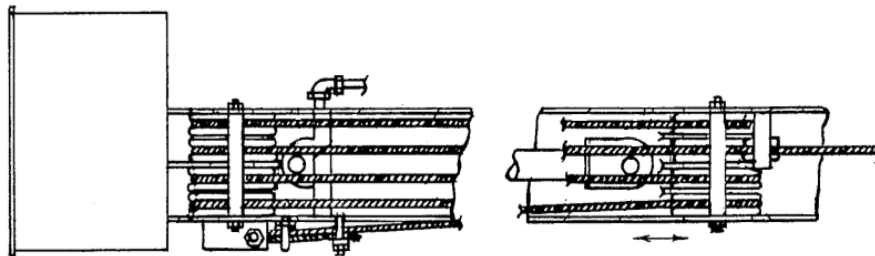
Multi sheaved hoisting system used in cantilever boat hoist.
